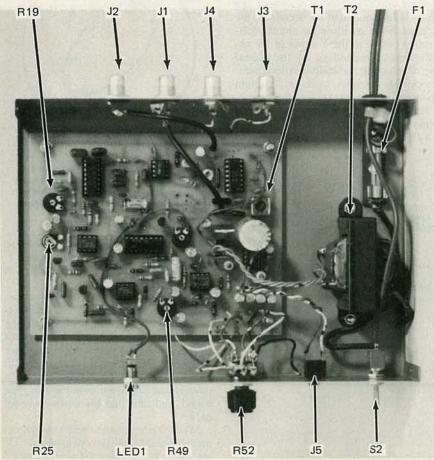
THE COMPLETED DECODER appears as shown here. The board shown was an early prototype, so it doesn't match the parts-placement diagrams (shown in Fig. 7 and Fig. 8) exactly.
